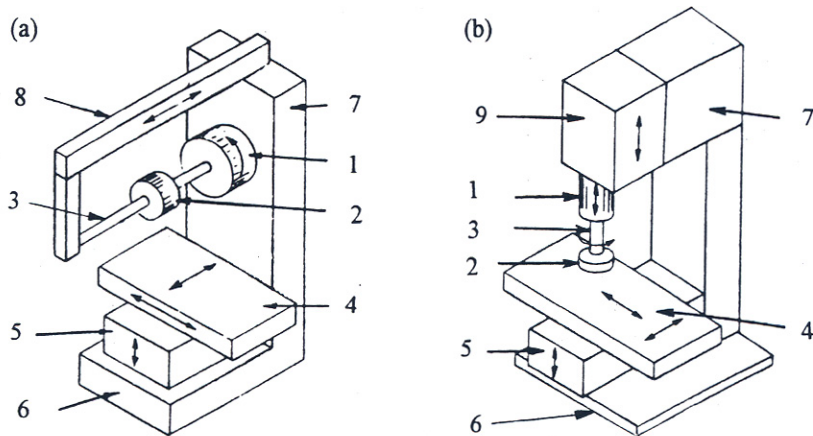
Major components of knee type milling machines with: (a) horizontal spindle, (b) vertical spindle. 1 - spindle, 2 - cutter, 3 - arbor, 4 - table, 5 - knee, 6 - base, 7 - column, 8 – over arm, 9 - head.
